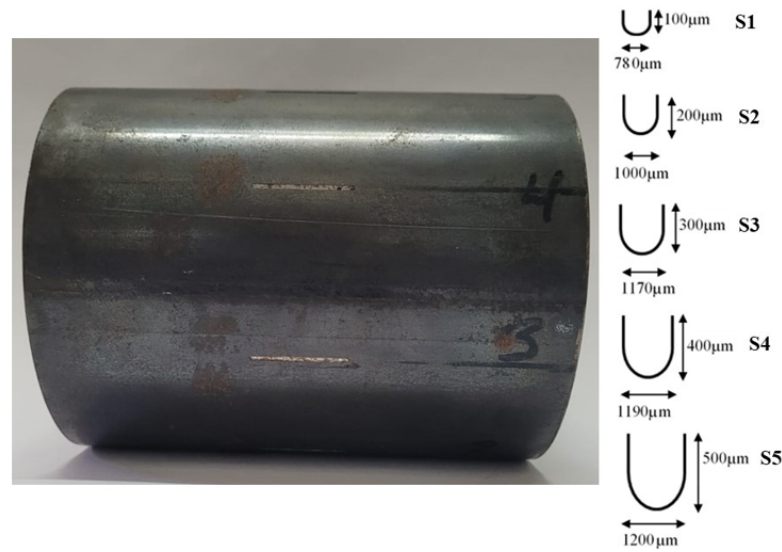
Dimensions of the five semi-elliptical defects machined on the surface of the ASTM A36 ferromagnetic pipe.
